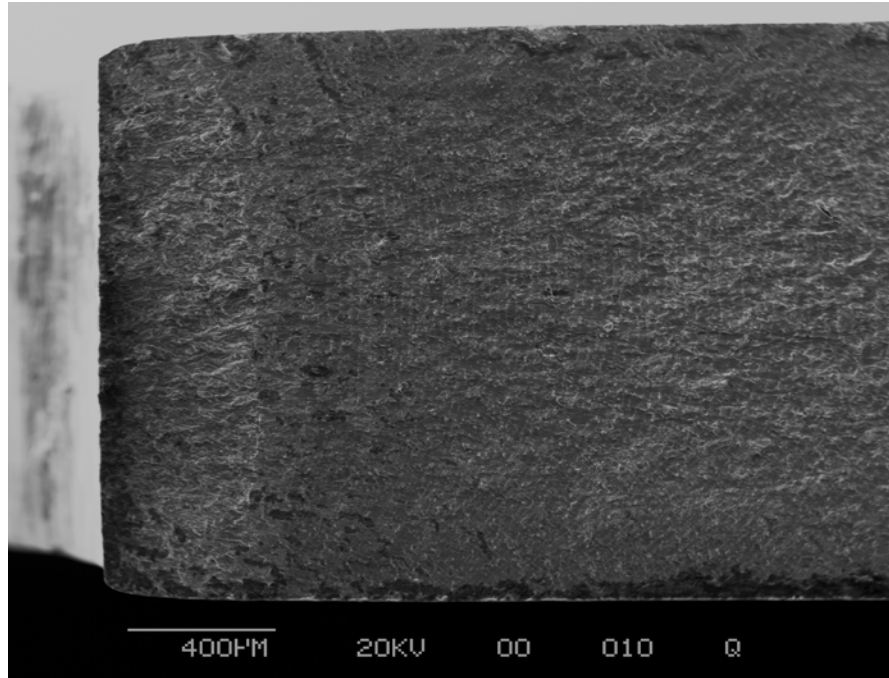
Fracture Surface of specimen 3S showing crack initiation area
